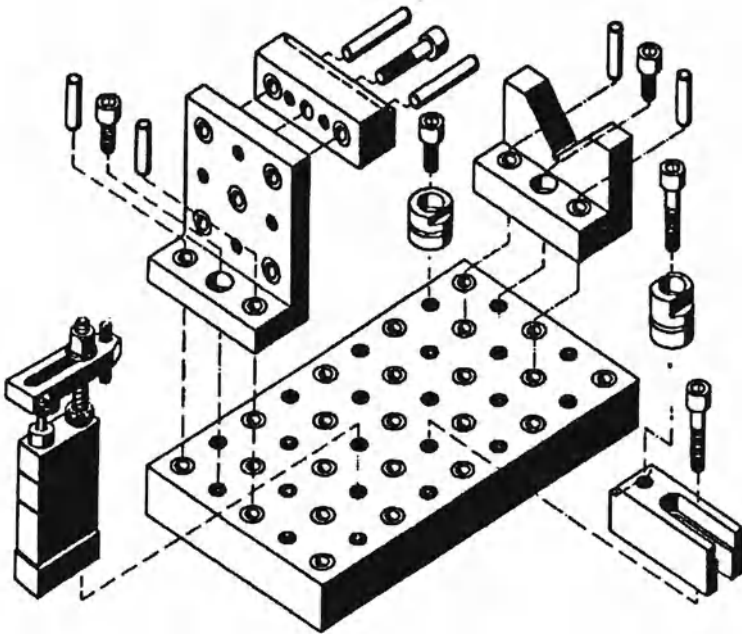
An example of a modular fixture assembly [6] (Courtesy of Blüco Technik)
